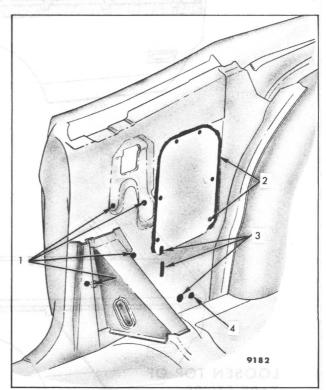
Rear Quarter Inner Panel Sealing - "E-67" Style
